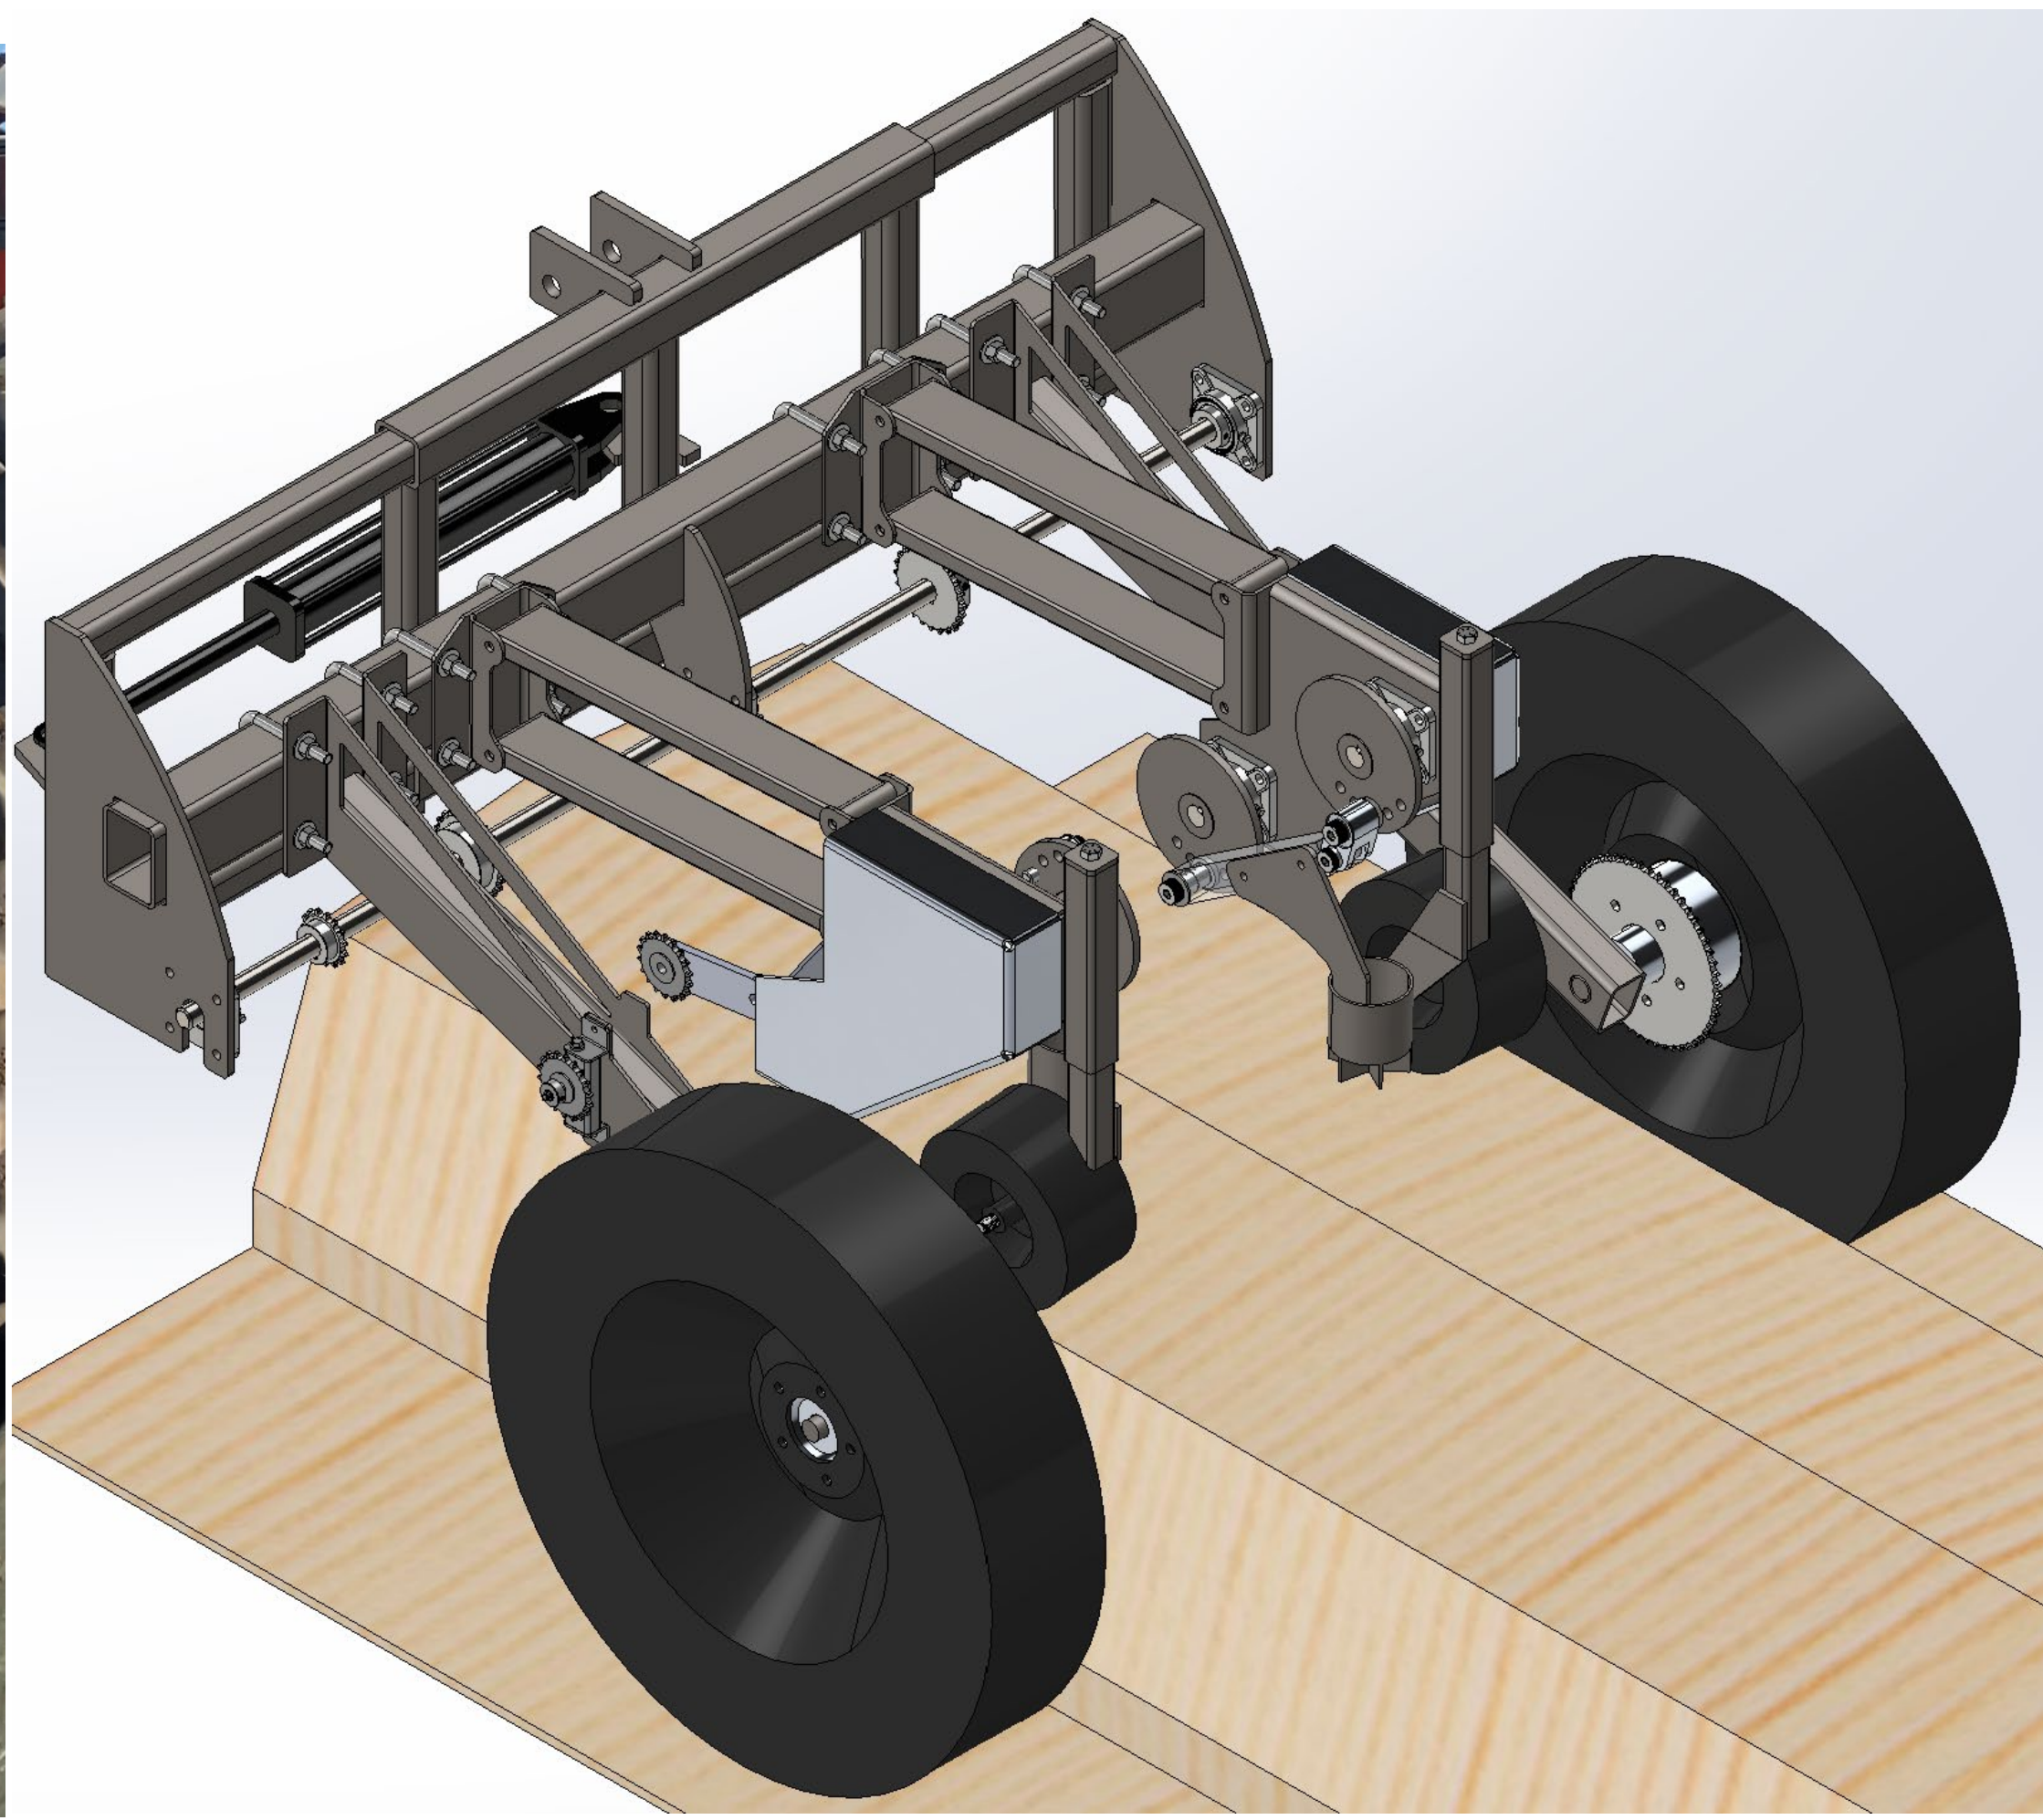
Version 2 of the Mechanical Hole Burner to be built in 2023
